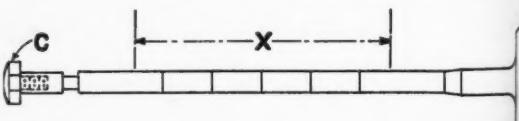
Drawing of valve stem, showing (X) section upset regrinding and (C) case-hardened capscrew used to take space left by upsetting.
